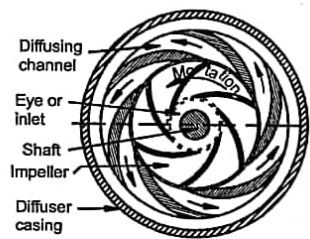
Impeller and diffusing channels in a centrifugal pump (Cross-section)
